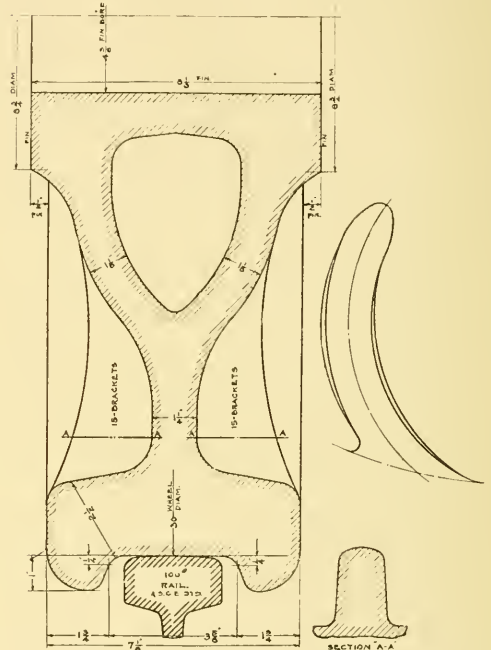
30 IN. S75 LB. DOUBLE FLANGE CHILLED IRON CRANE WHEEL, DOUBLE-PLATE TYPE
